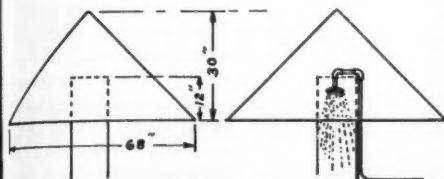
(Left) Dimensions of cone-shaped hood. (Right) Illustrating method of attaching water spray in top of tank exhaust pipe.
